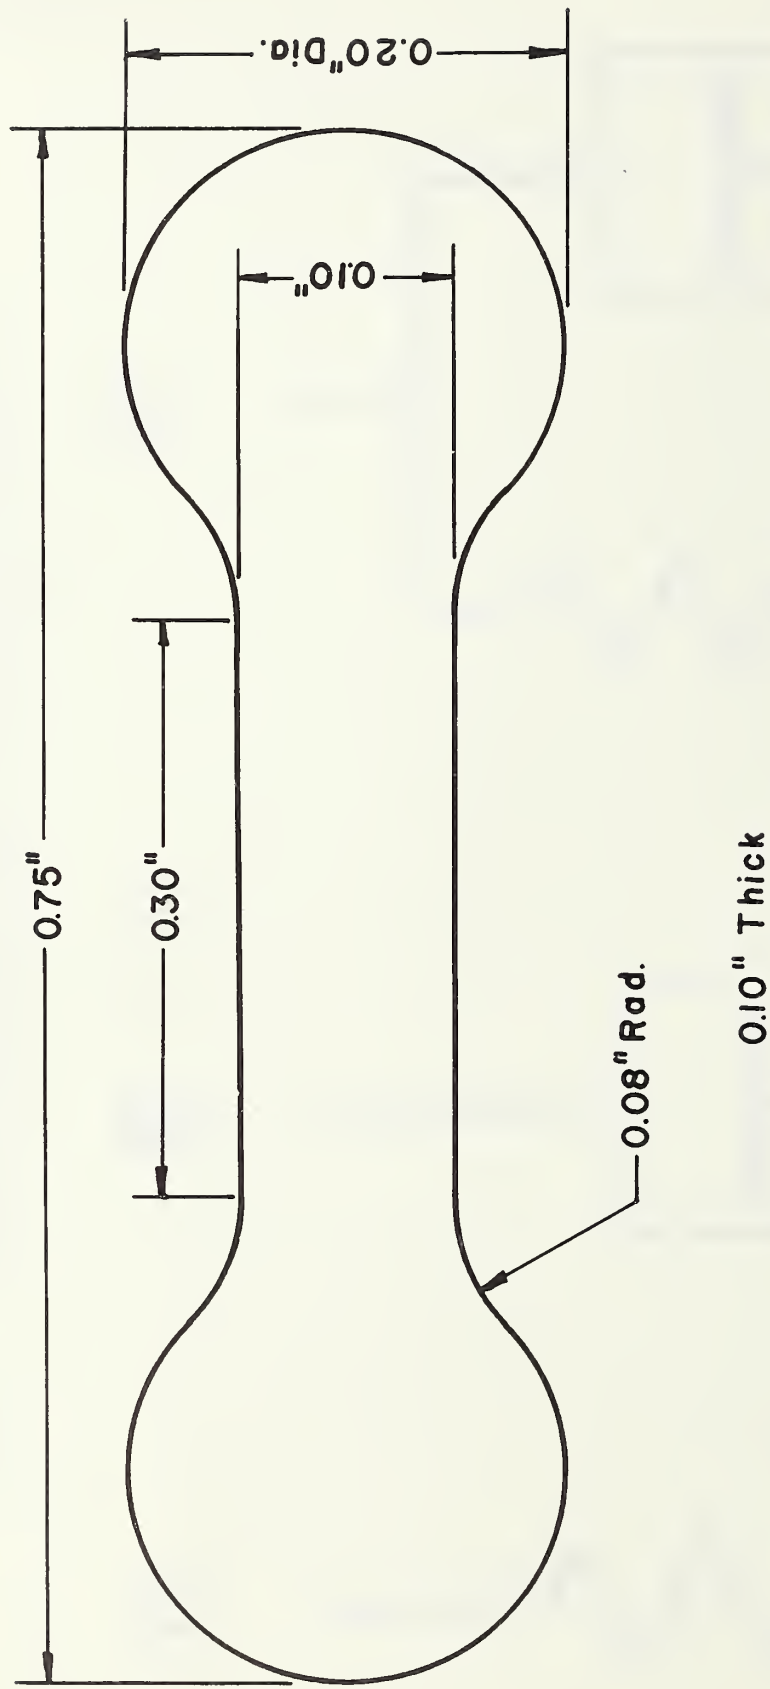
Dimensions of the dumbbell-shaped tensile specimen of amalgam.
